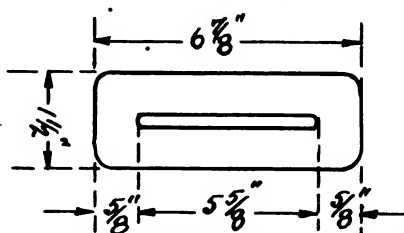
DIMENSIONS FOR FLAT BAR USED IN FORGING WELDLESS RINGS
